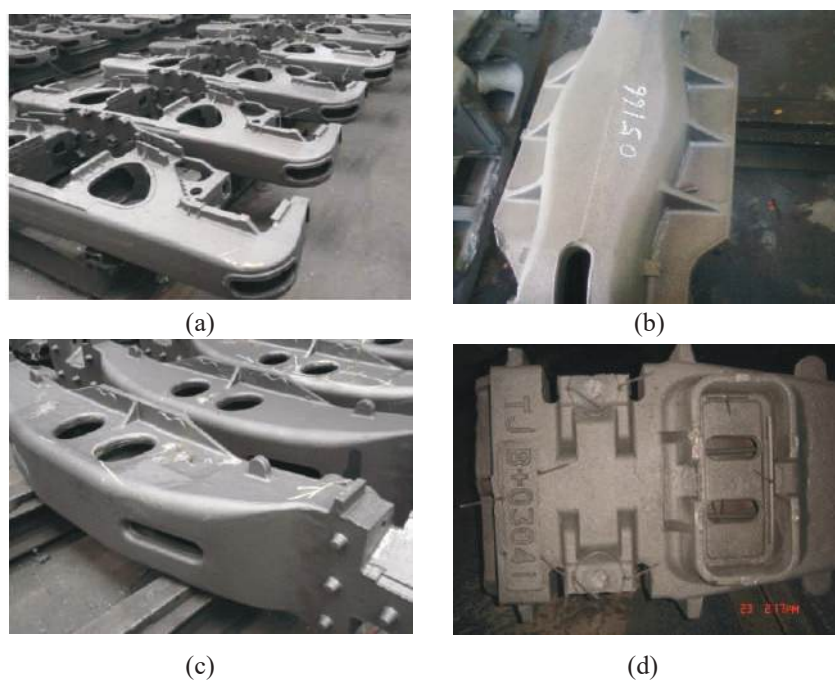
Surface finish of (a) side frames (b) low beam surface of a side frame (c) swing bolsters and (d) local area of a swing bolster marked part number before shot blasting by spraying coating on green sand moulds.
